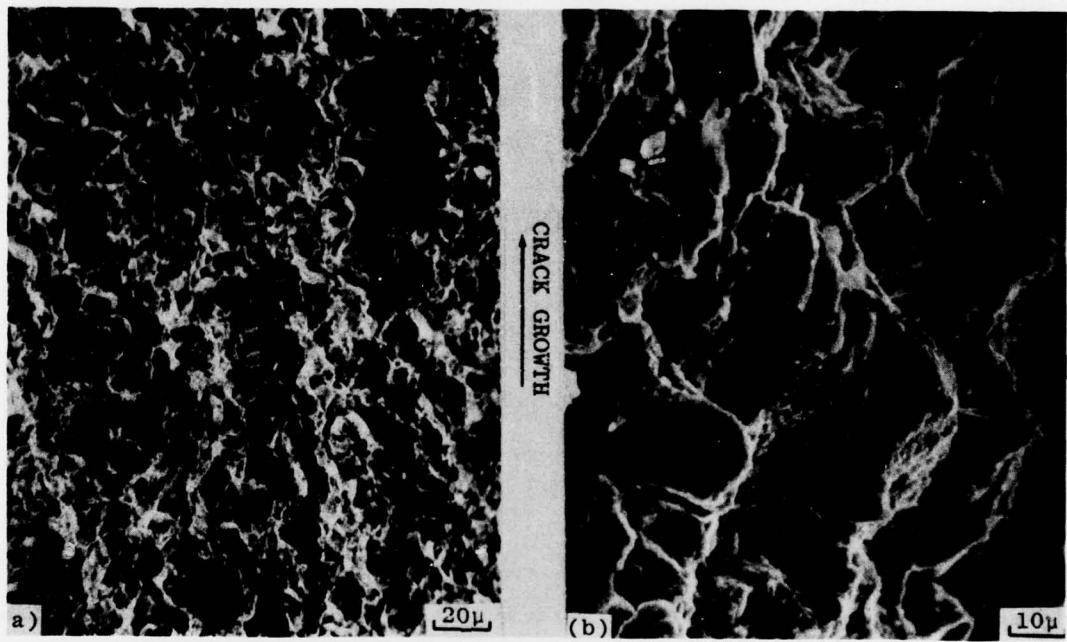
Fracture surfaces for heat treatment A
